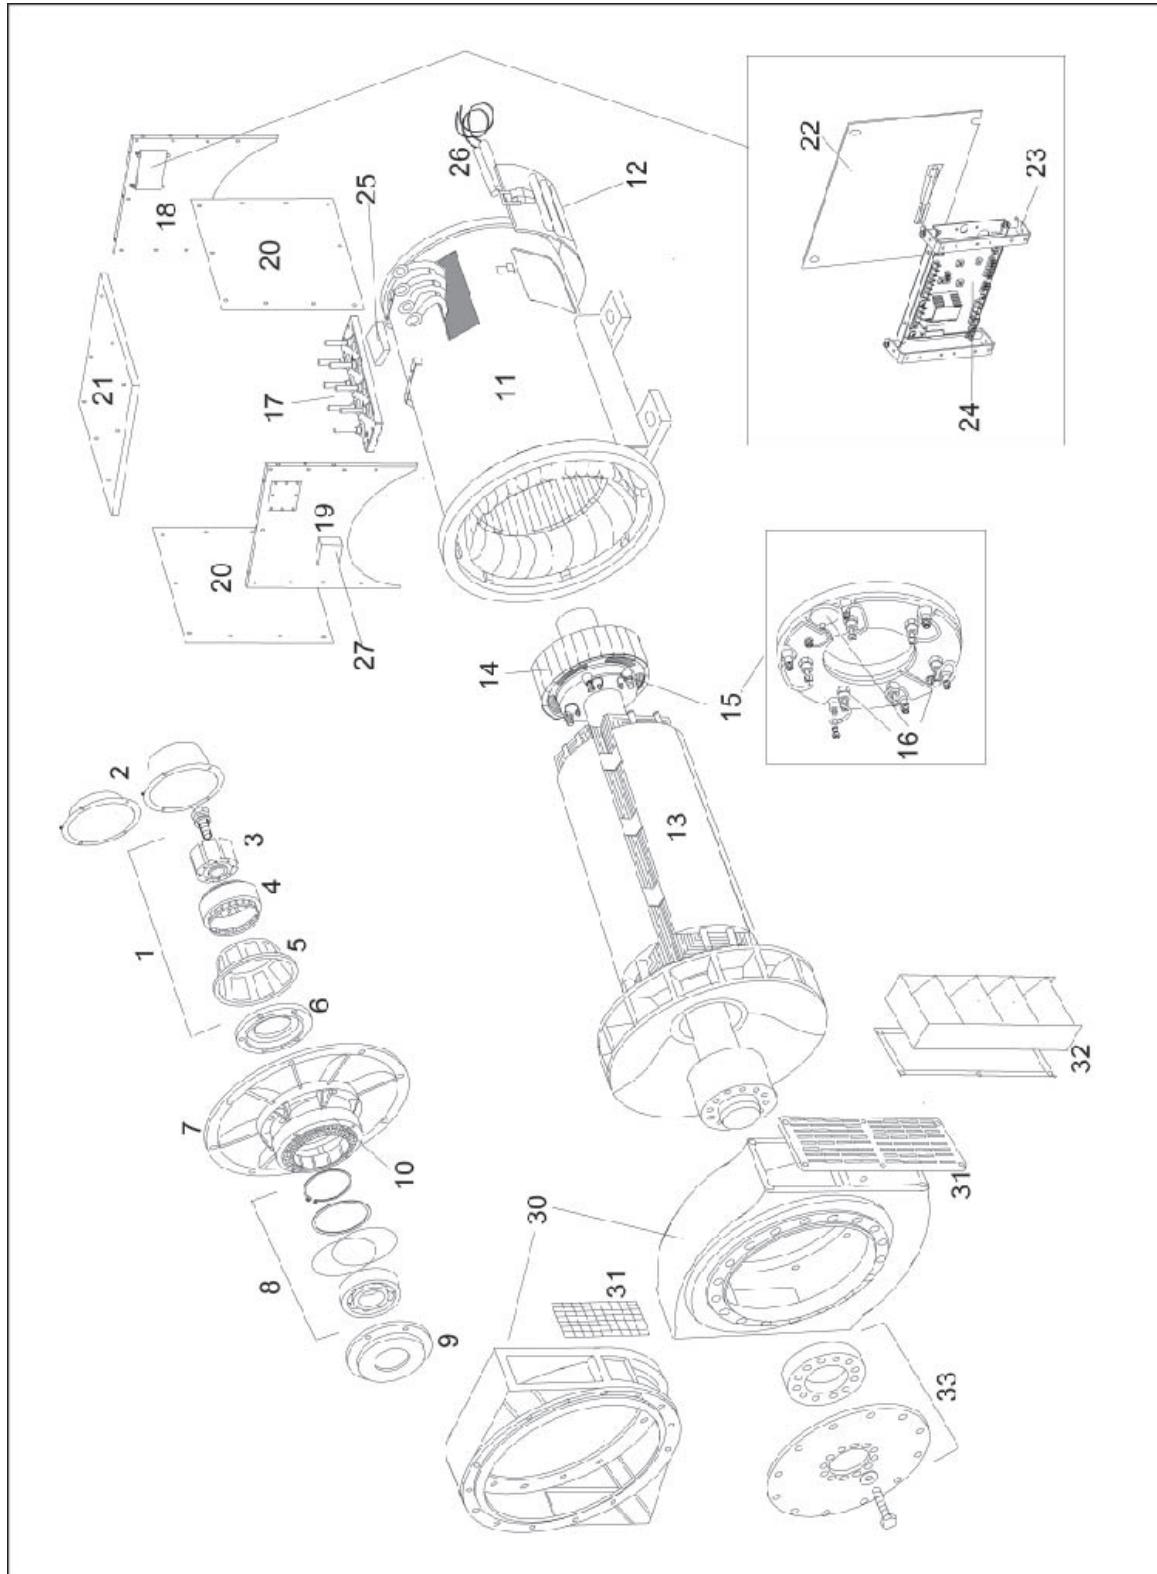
HC4 SINGLE BEARING ALTERNATOR
